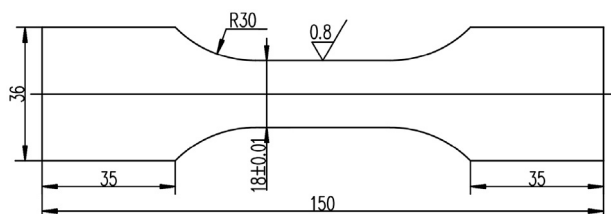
Dimension of 2024-T3 alloy used in fatigue testing.
